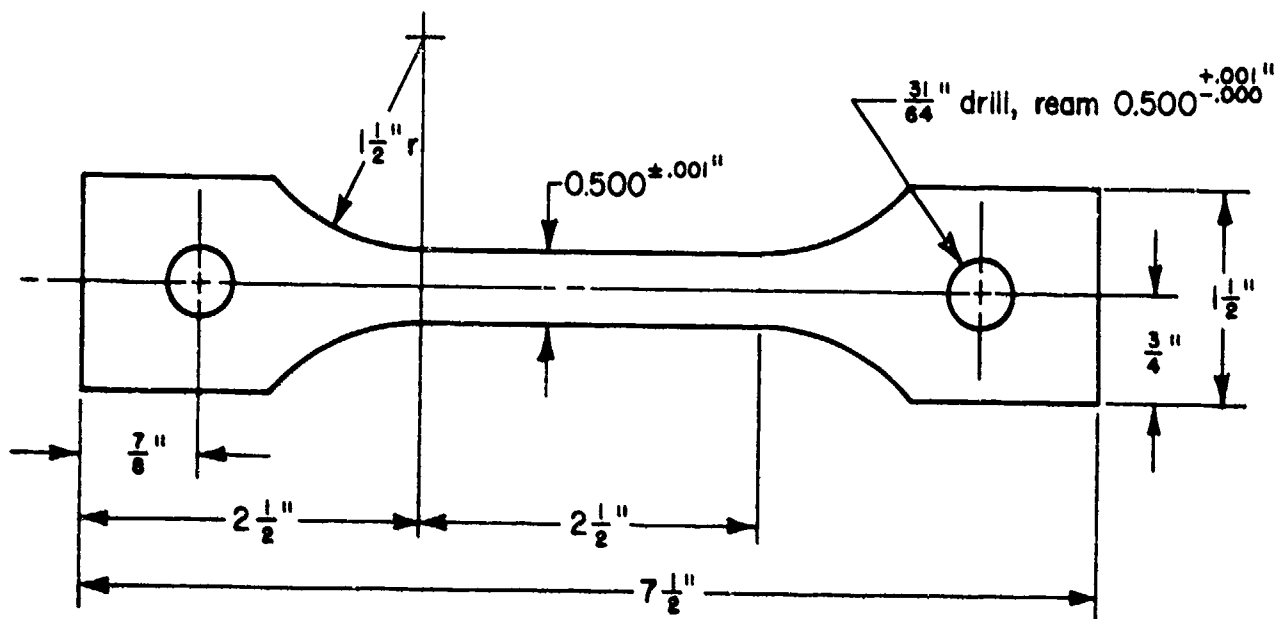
SHEET AND THIN-PLATE TENSILE SPECIMEN
